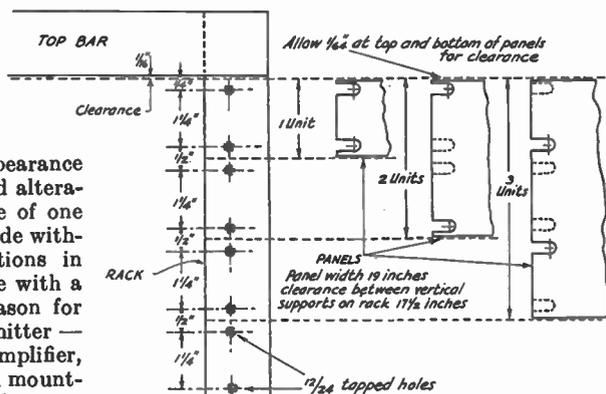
DRILLING AND PANEL DIMENSIONS OF THE STANDARD RELAY RACK
